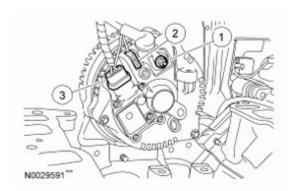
Locating Generator Bolts Courtesy of FORD MOTOR CO.
